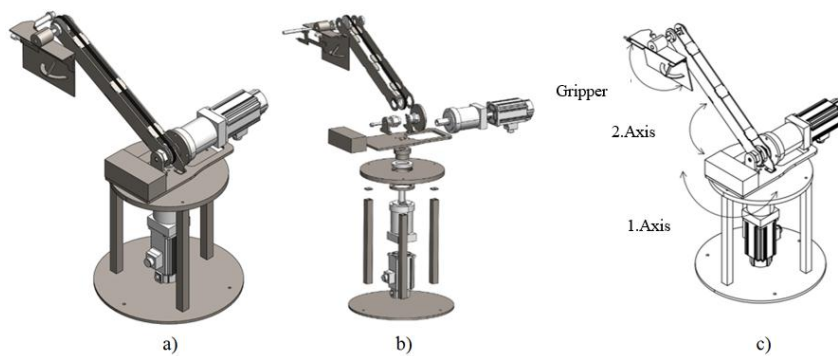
a) General virtual view of the robotic arm b) Exploded assembly view of the robotic arm c) Axes and end-effector
